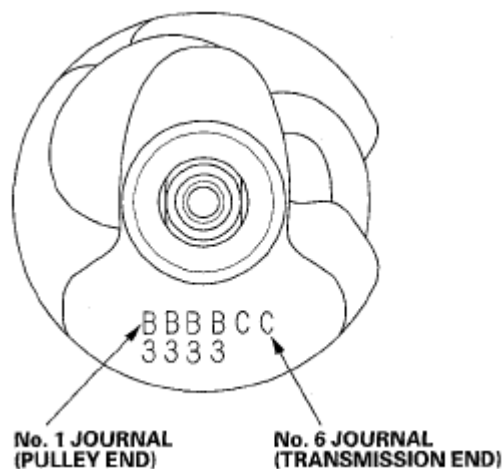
Identifying Connecting Rod Journal Code Locations (Letters Or Bars)
